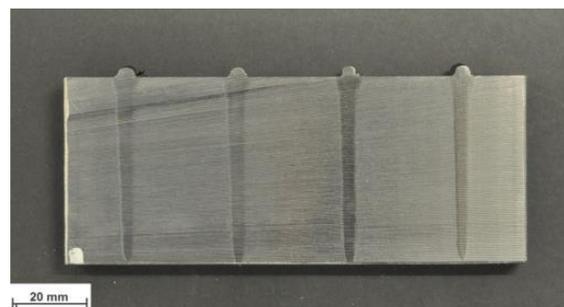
Comparative bead on plate welding of a P91 to investigate the filler material suitability
